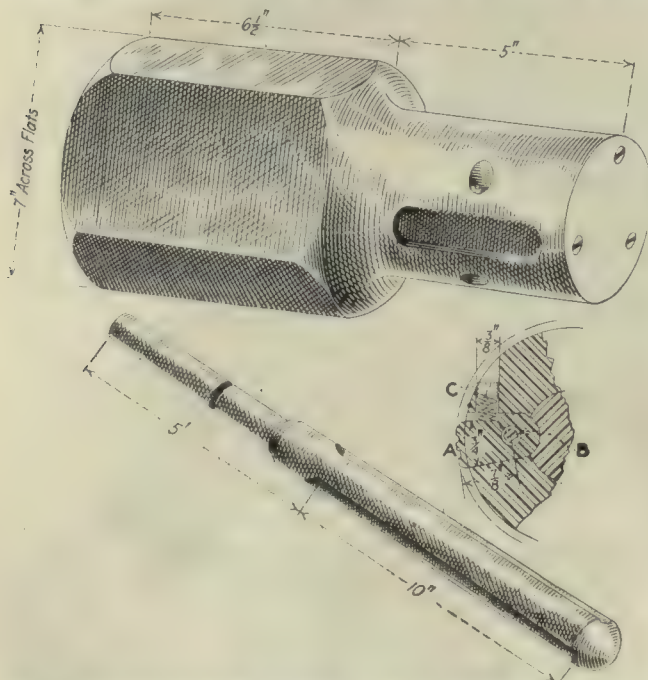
EXPANDING MANDREL FOR HAMILTON LATHE. OPERATION 2
